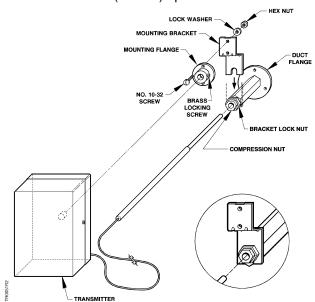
Mounting the Remote Transmitter Bulb in an Existing Duct Flange.
